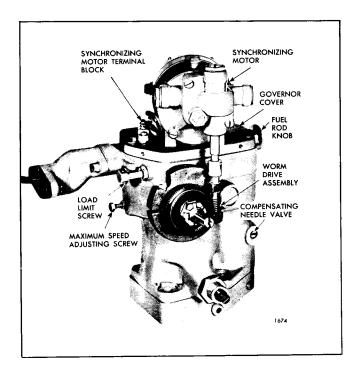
Typical Synchronizing Motor Mounting and Drive Assembly
